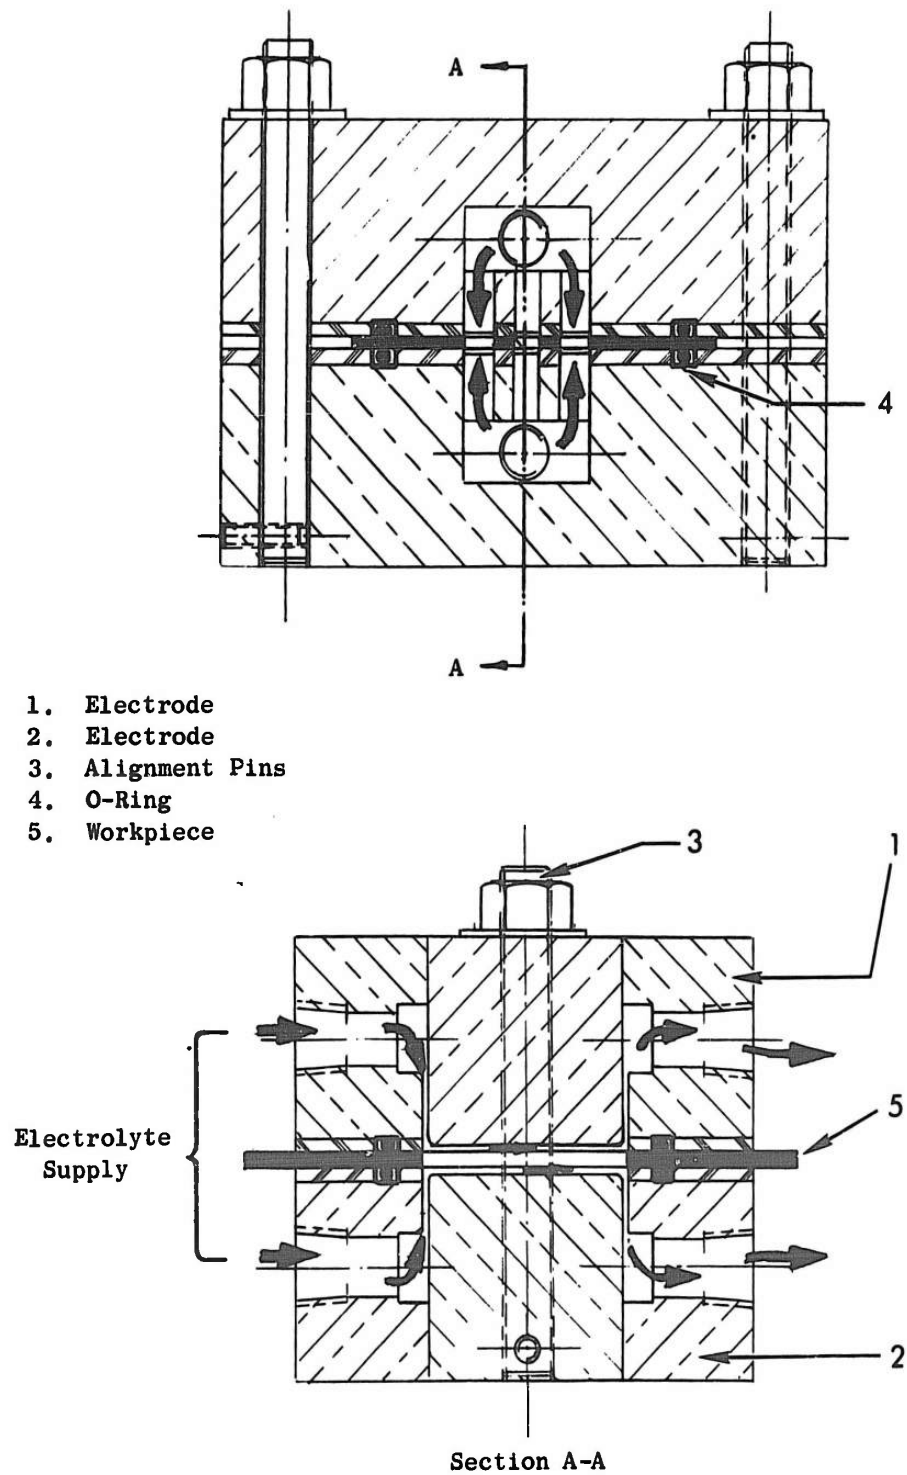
Schematic Sketch of Tooling for Exemplary Parts 4-7
